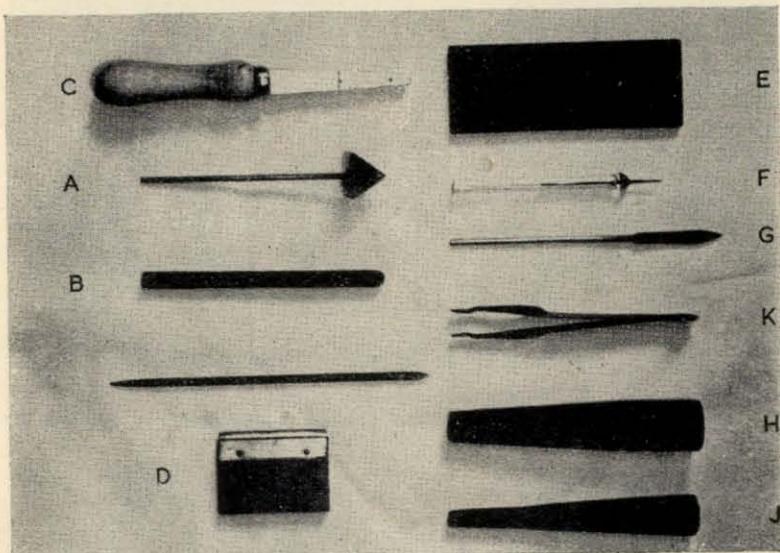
FLANGING TOOLS AND REQUIREMENTS
